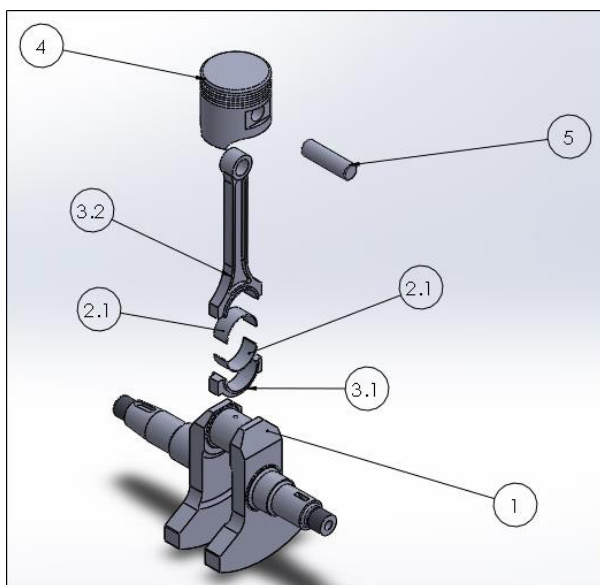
Slider-crank assembly: 1) crankshaft; 2) bushing; 3) piston rod; 4) piston; 5) pin.
